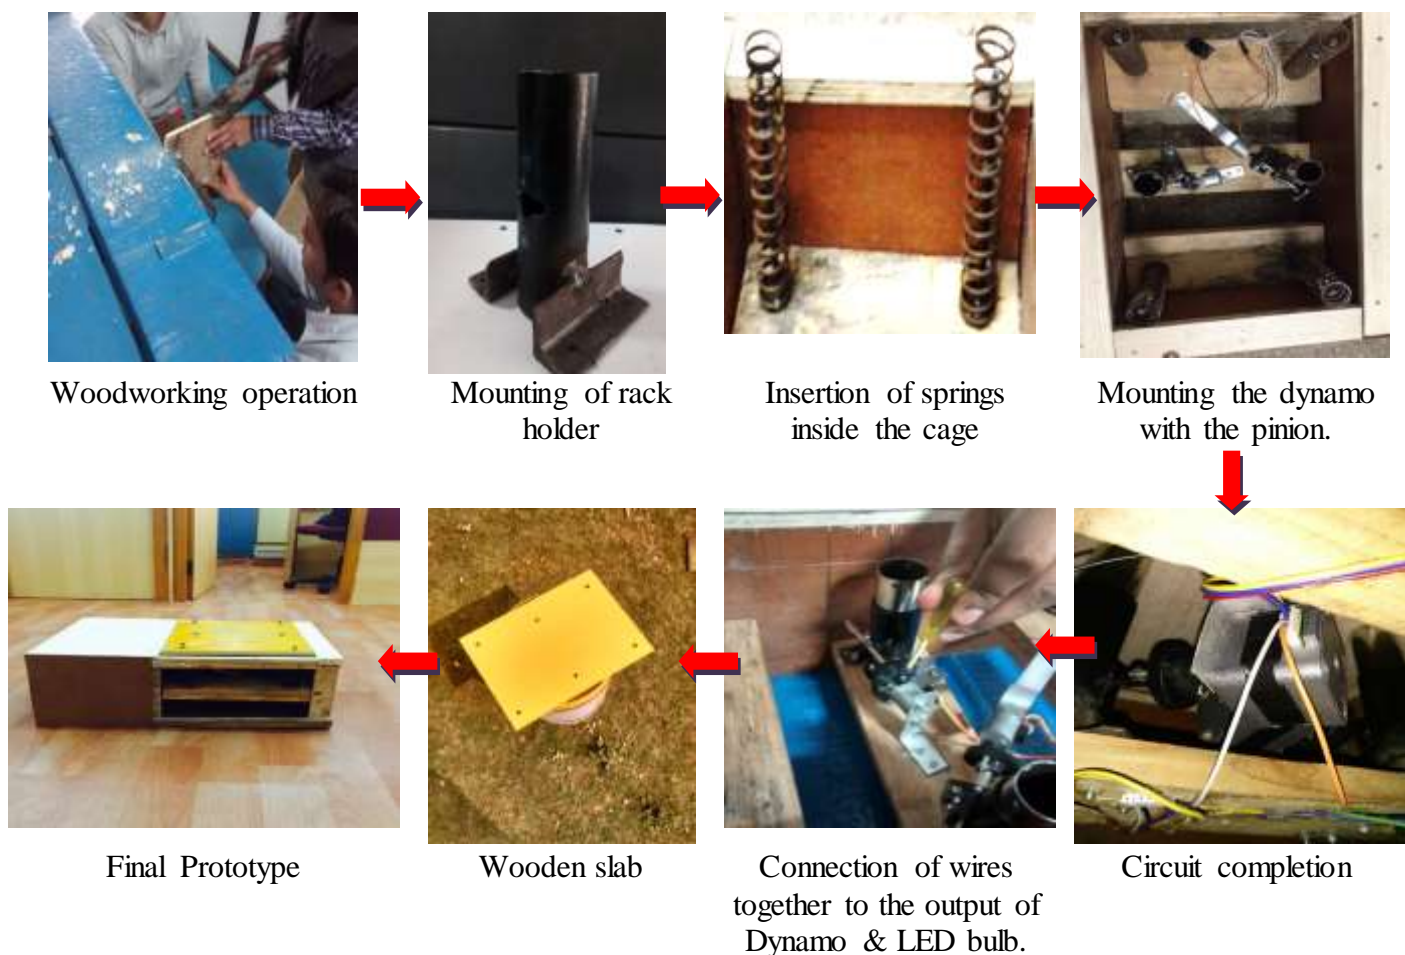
Assembly of the components to make an Energy harvesting through footstep prototype
